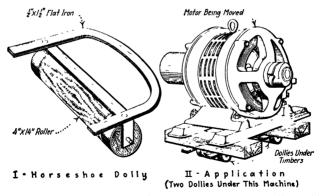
The horseshoe dolly and its use for moving small machinery.
